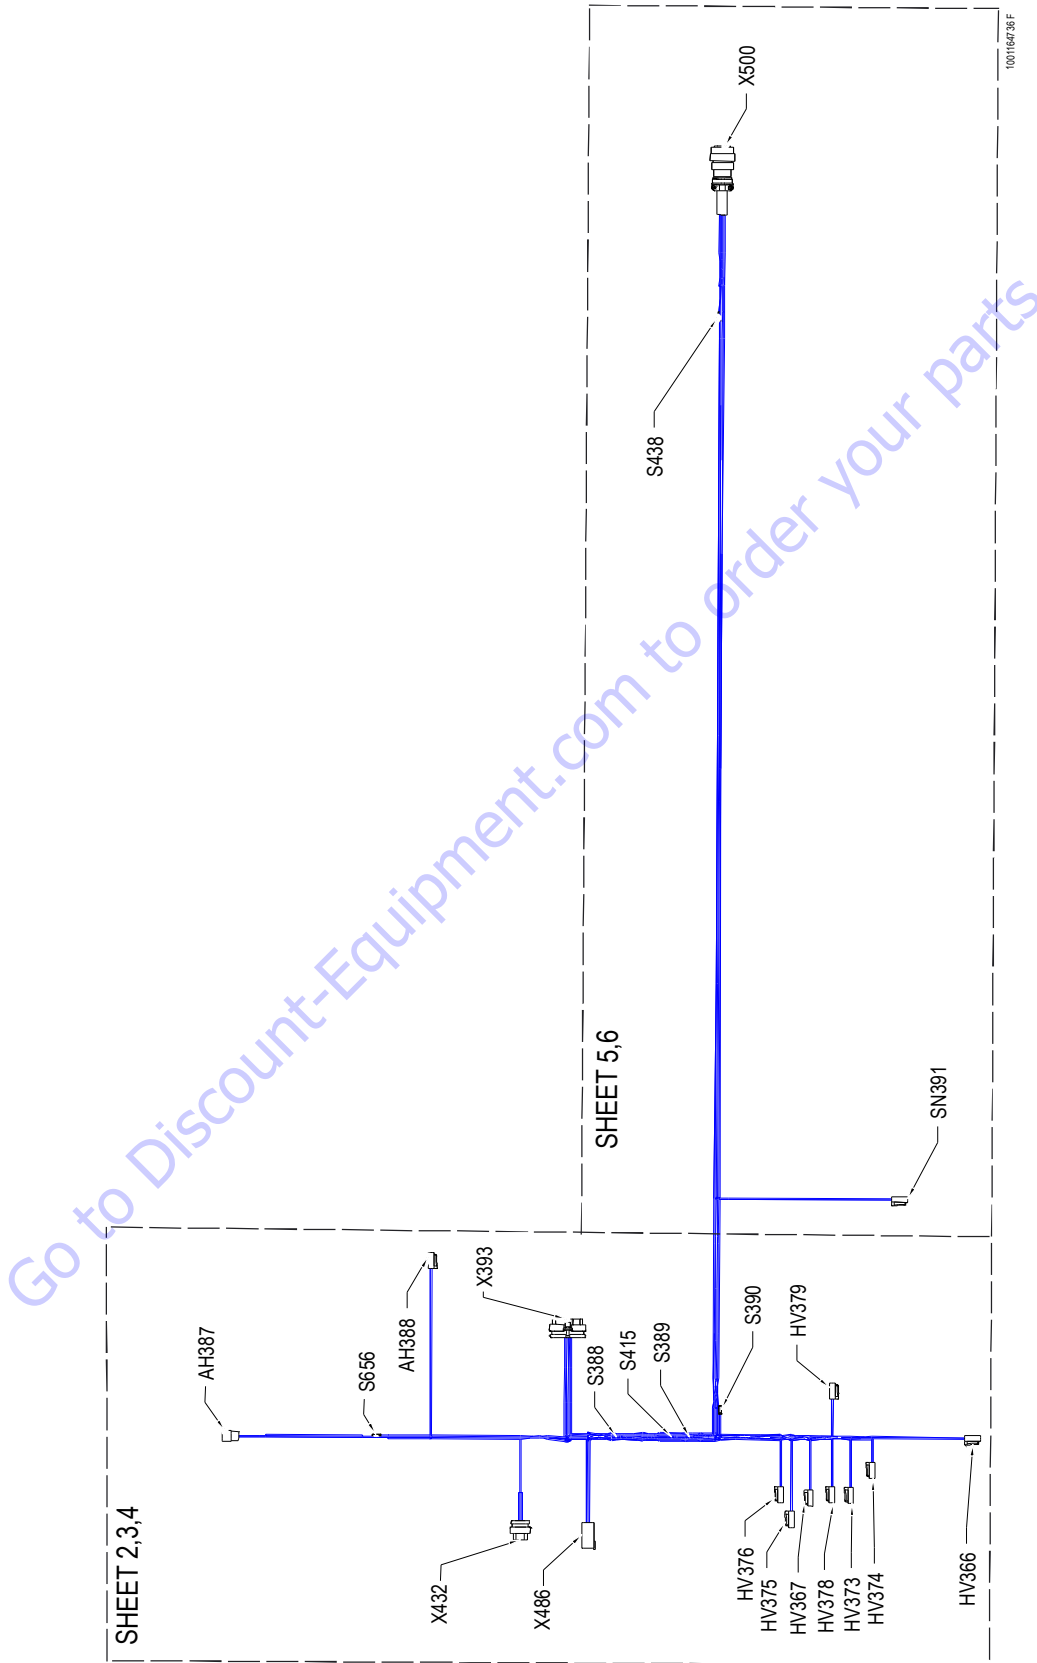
Main Valve Harness - Sheet 1 of 8
